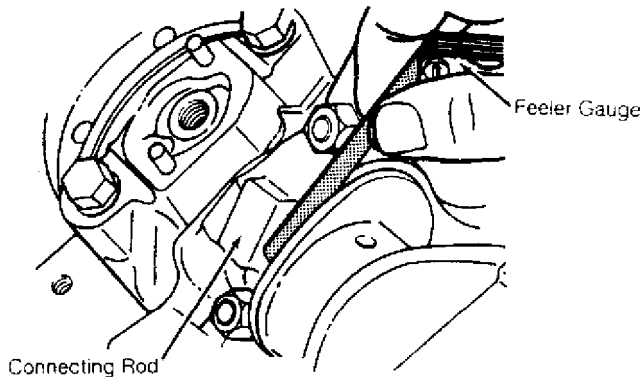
Measuring Connecting Rod Side Clearance - Typical
